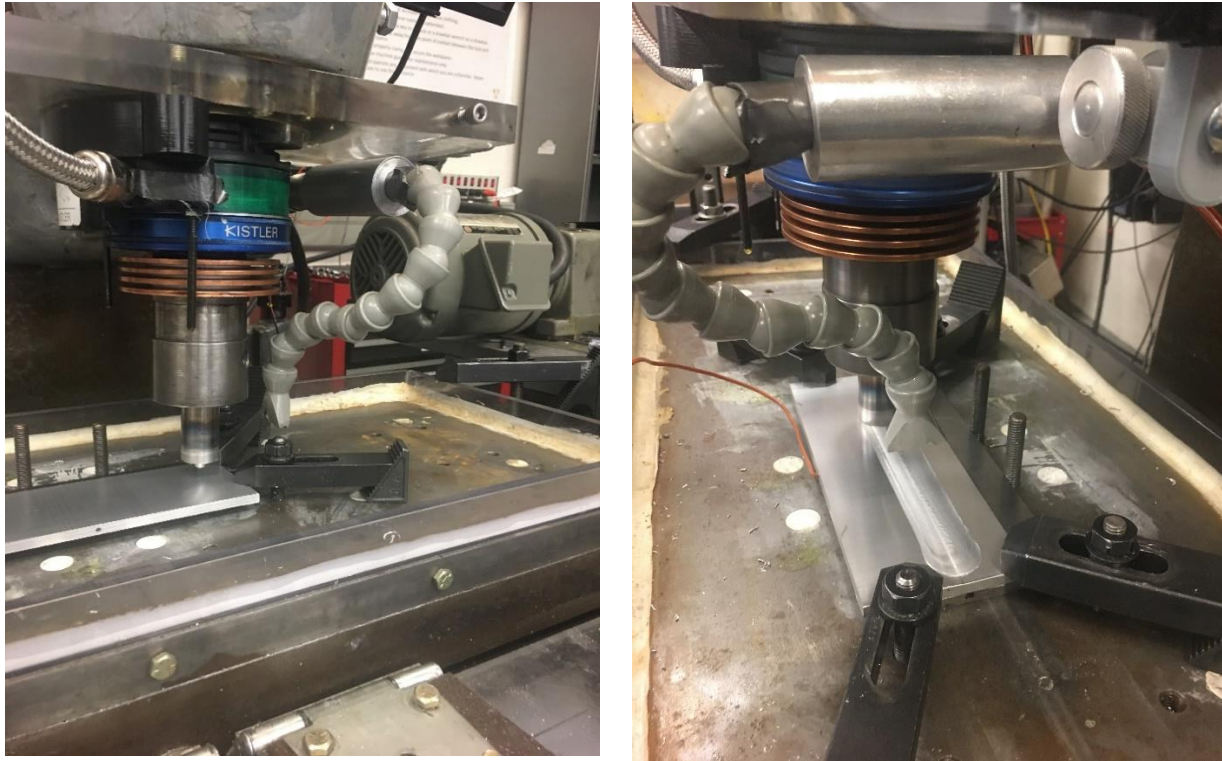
(Left) The vortex tube orientation before the start of the weld. (Right) The AC process with the vortex tube in action along the weld line.
